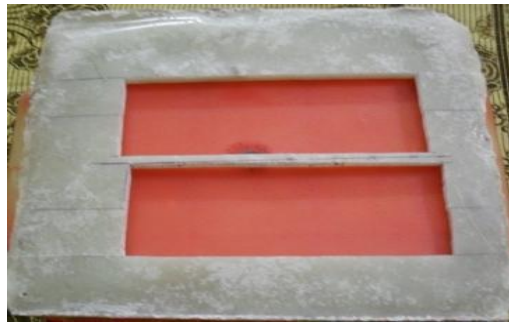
Laminate Moulded from the Metallic Mould by Compression Moulding Technique
